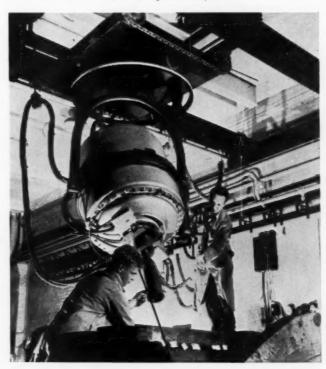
POSITIONING 1000-KV X-RAY EQUIPMENT PREPARATORY TO RADIOGRAPHING A CASTING
